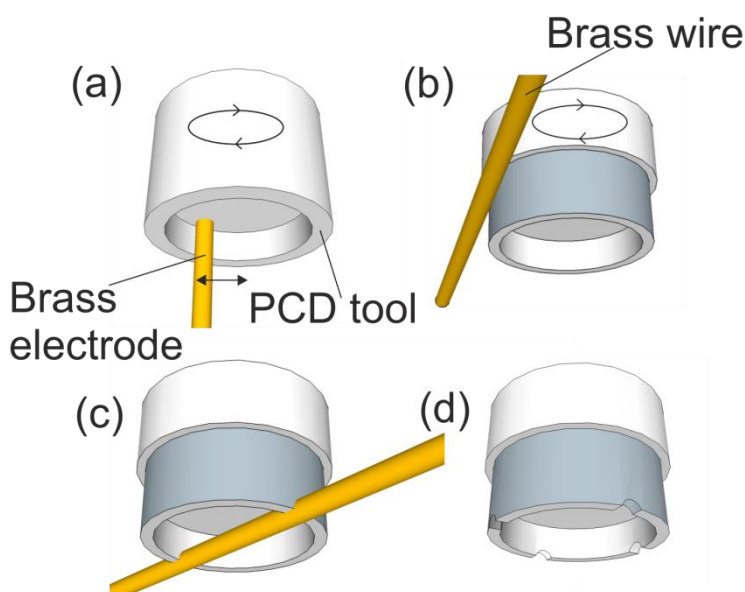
Fabrication steps for ring tool (a) Centre of tool is hollowed out with straight brass electrode (b) Wire is used to remove runout from outer edge (c) Wire is used to cut teeth into tool (d) Finished tool.
